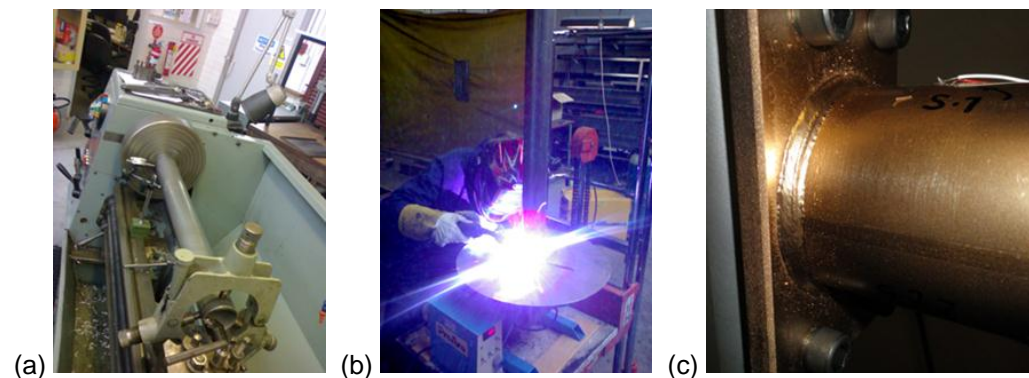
(a) Machining of the end of the specimen, (b) rotating set up for accurate welding, (c) welded end of the specimen.
